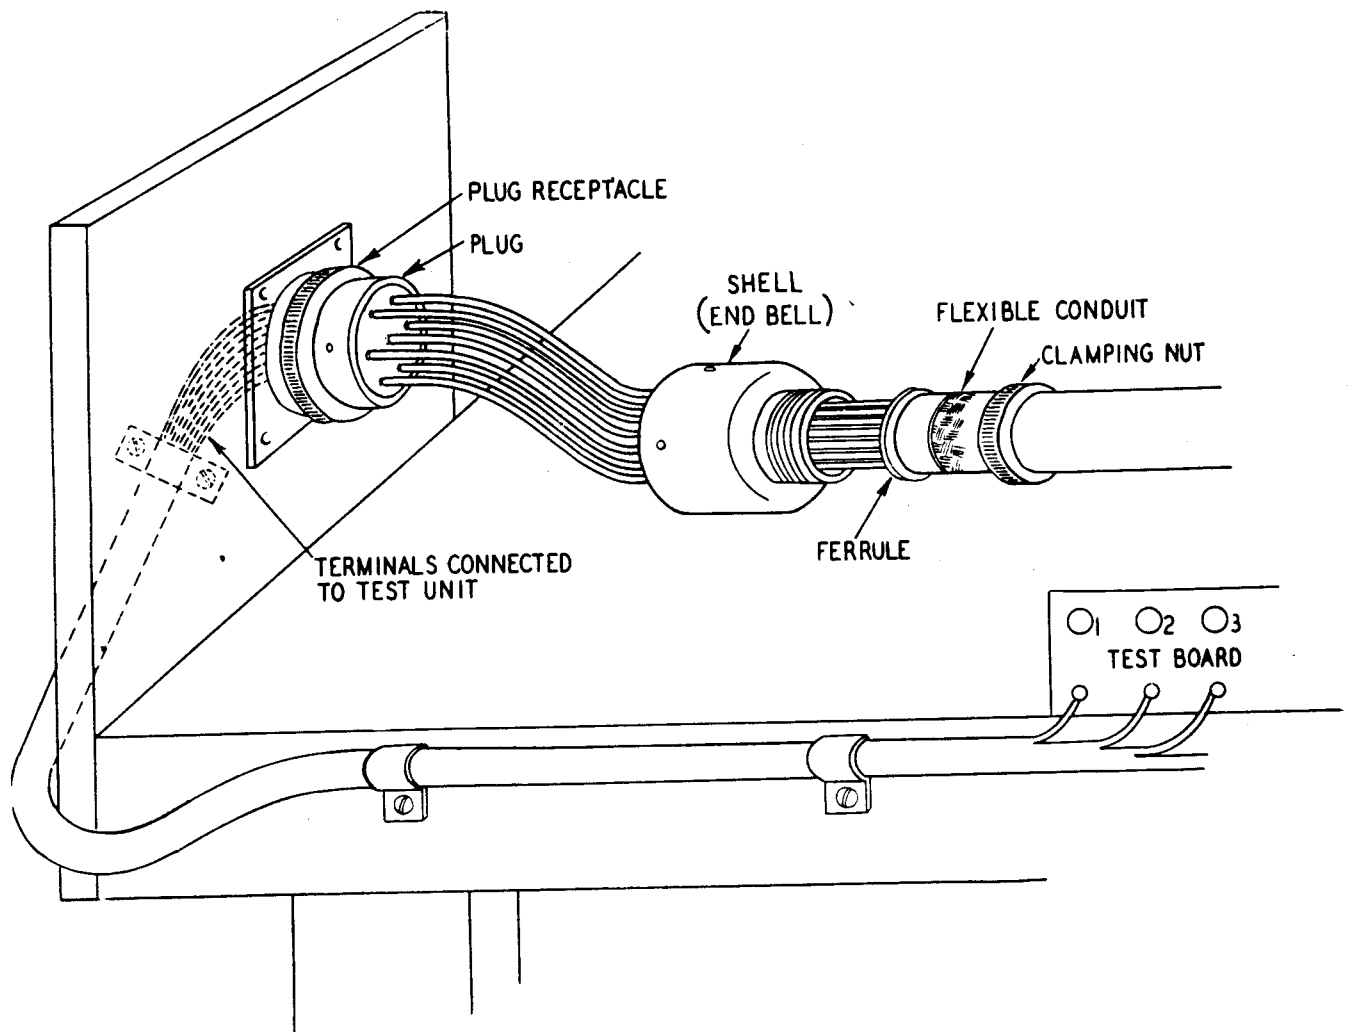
PLUG RECEPTACLE MOUNTED ON BOARD FOR SOLDERING AND CHECKING MULTI-WIRE FLEXIBLE CONDUIT CABLES
